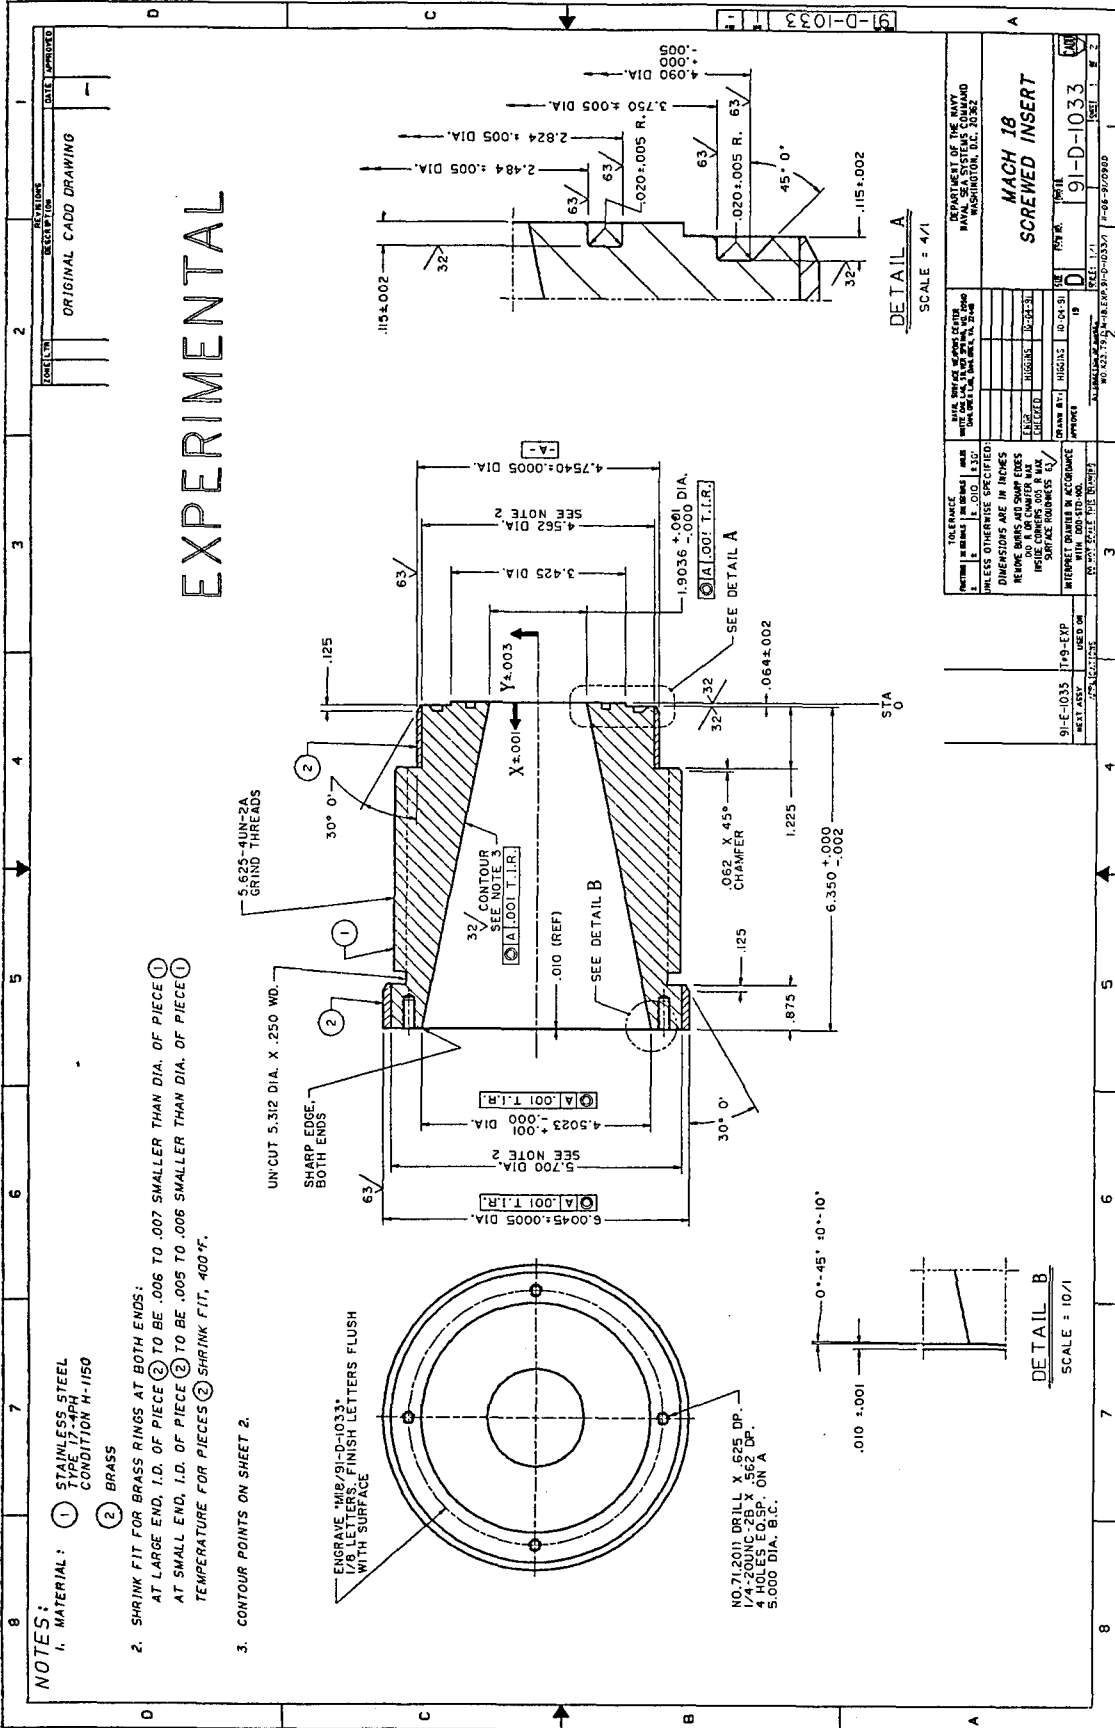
MACH 18 NOZZLE SCREWED INSERT SECTION
